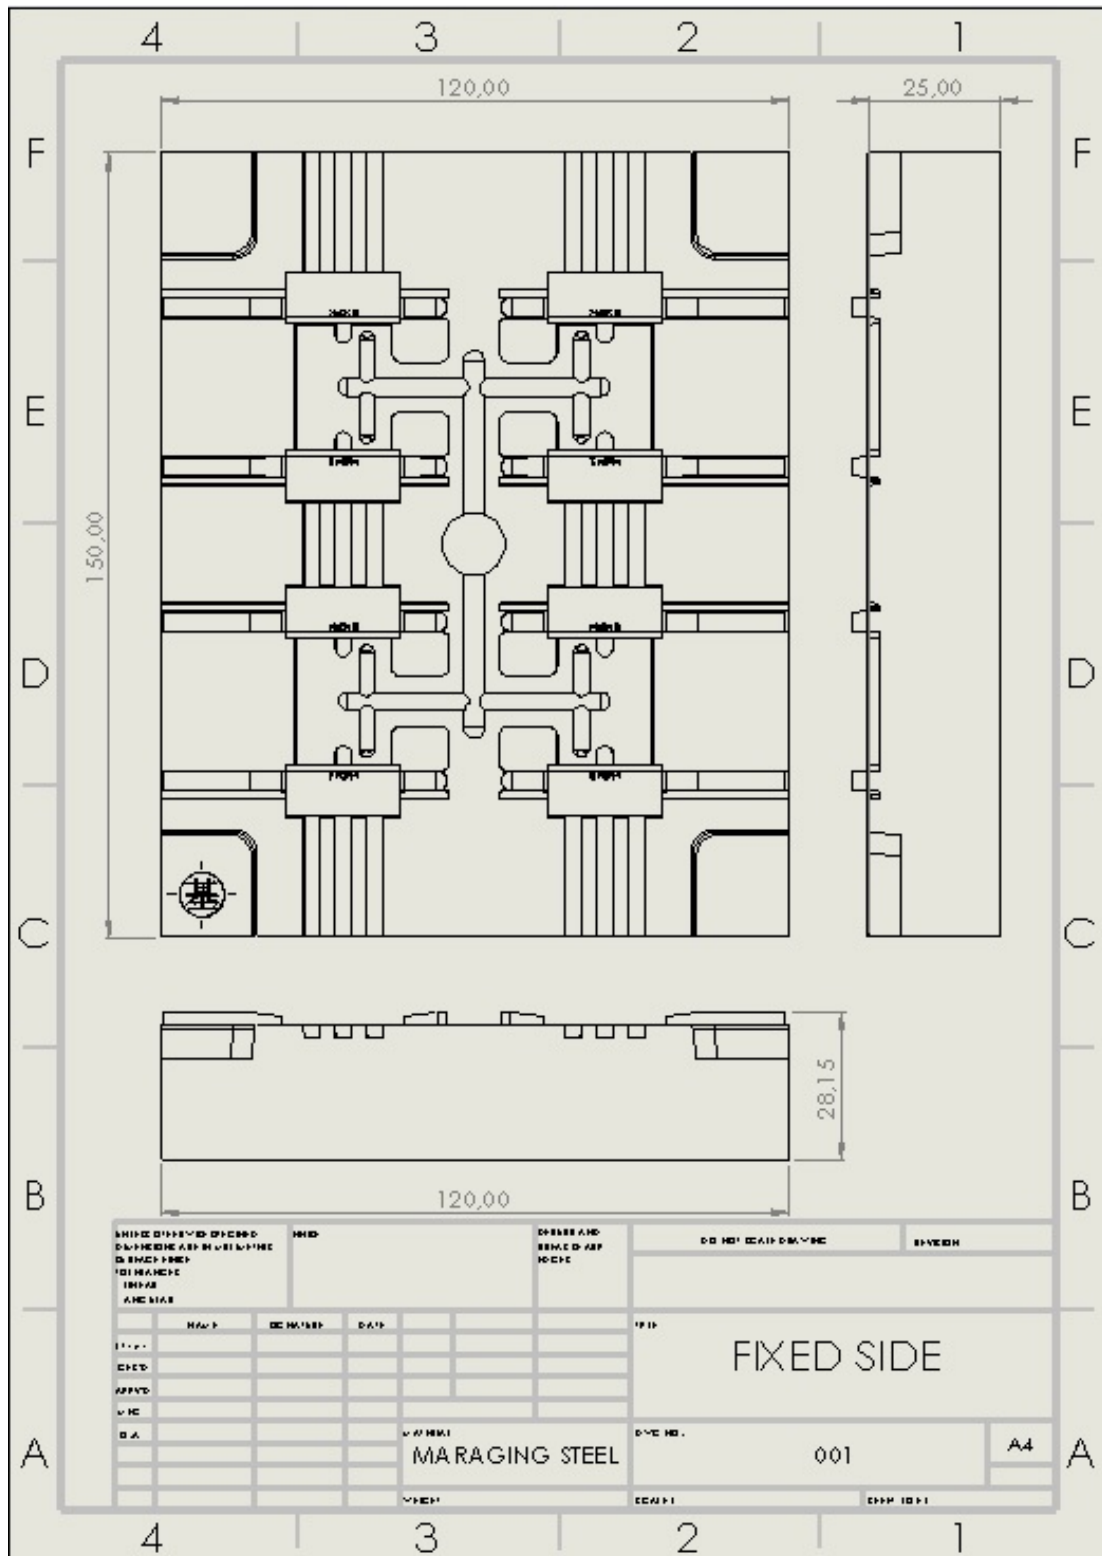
CAD draft showing the fixed side of the Altech -JEC mould
